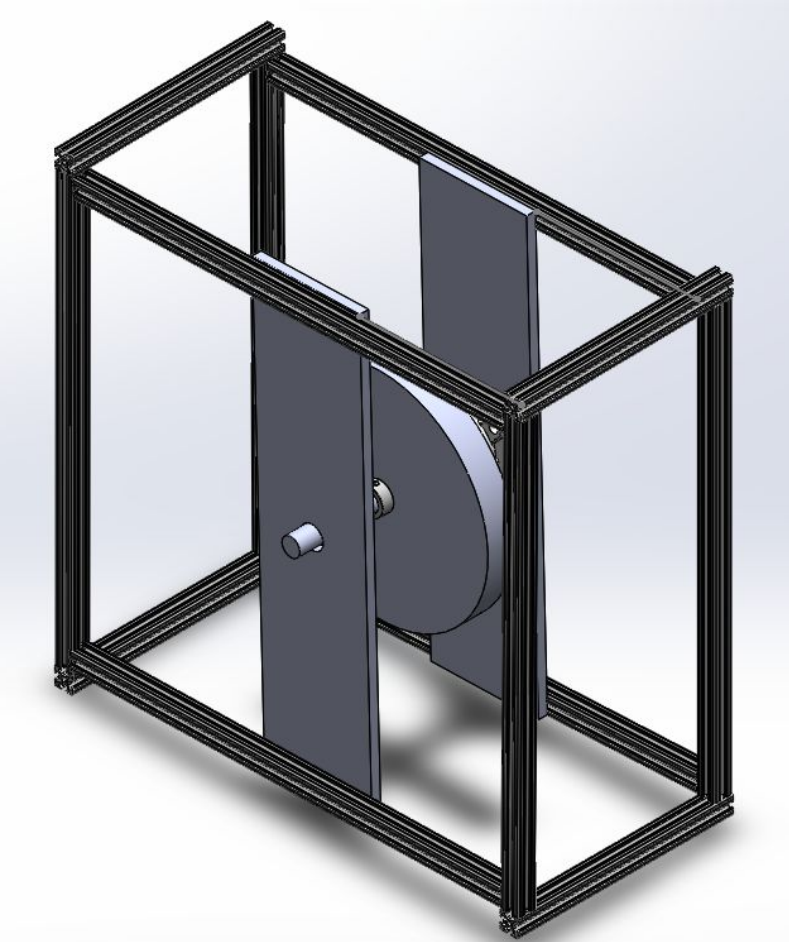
Figure B: CAD Model created in SolidWorks of the finalized flywheel prototype rotor and frame assembly
